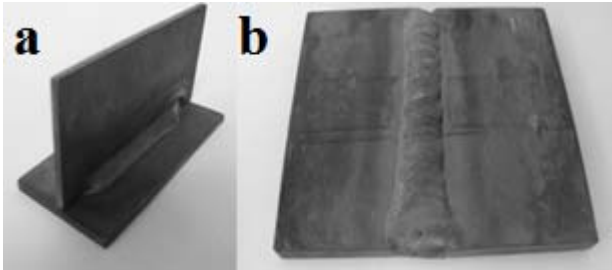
Steel welding a) and Ti alloy welding b) using CSE [9, 10].
